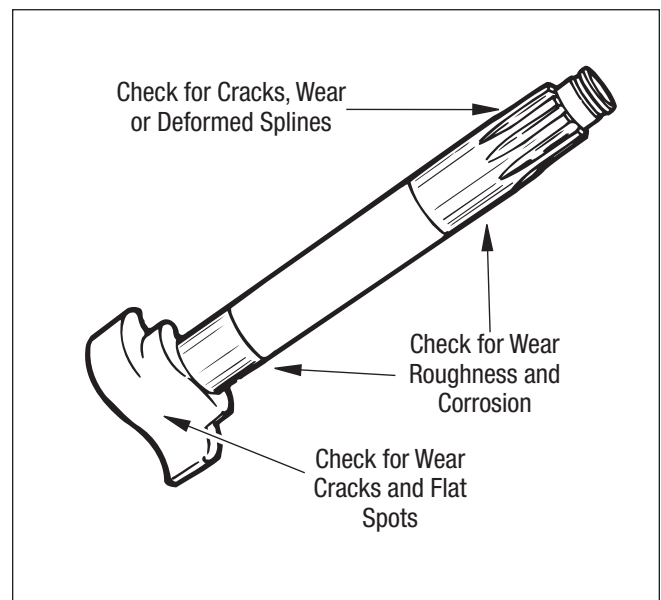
Camshaft Radial Play Inspection
